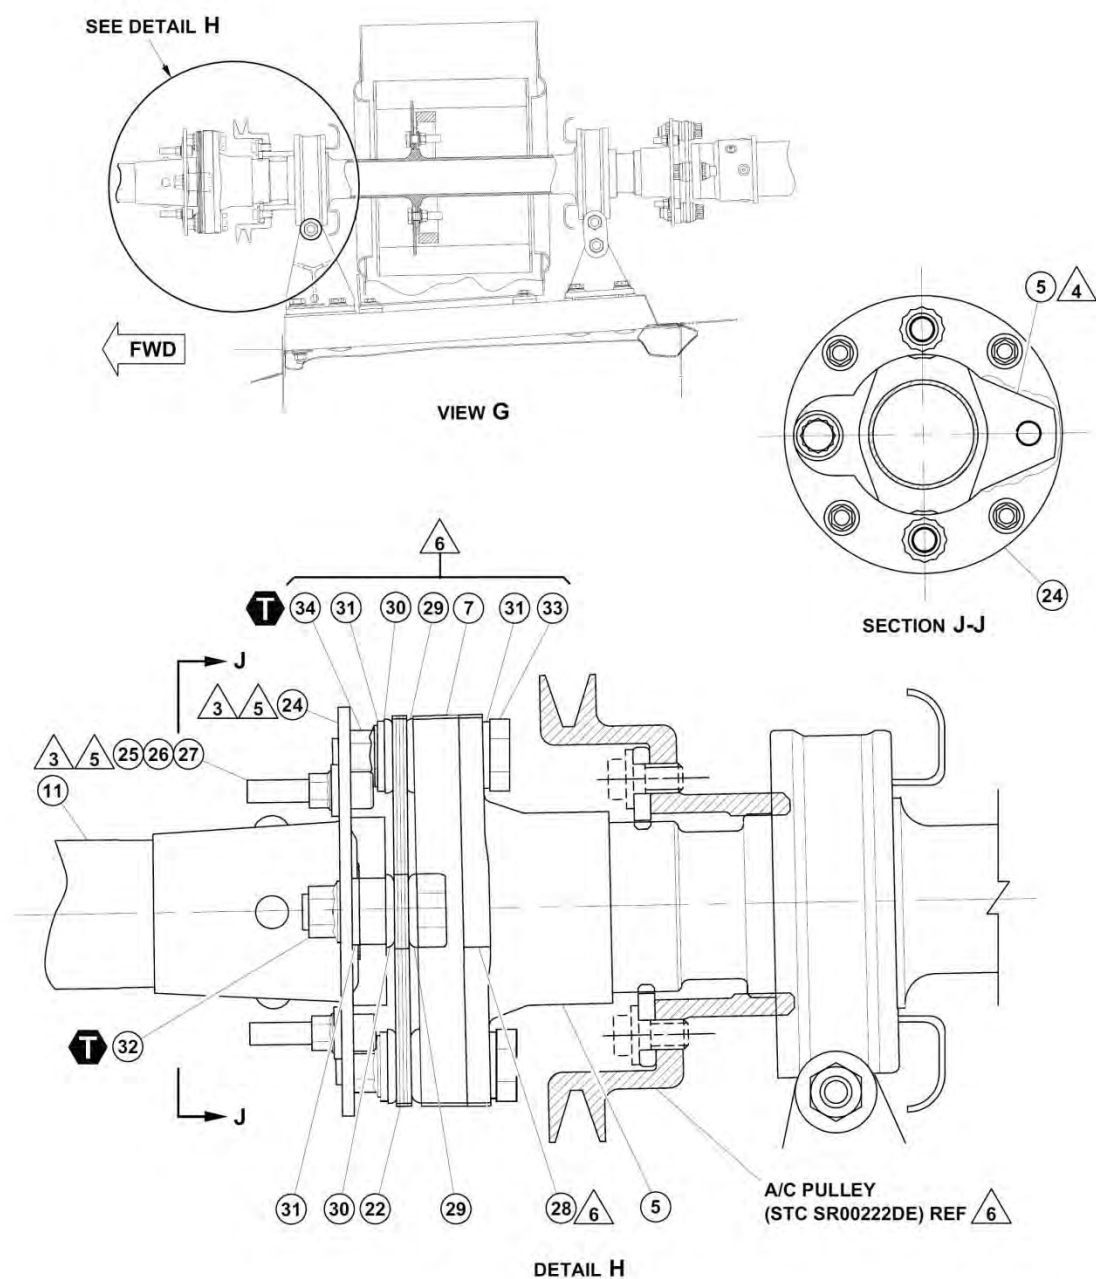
Forward Short Shaft Assembly – Removal/Installation (Sheet 4 of 5)
